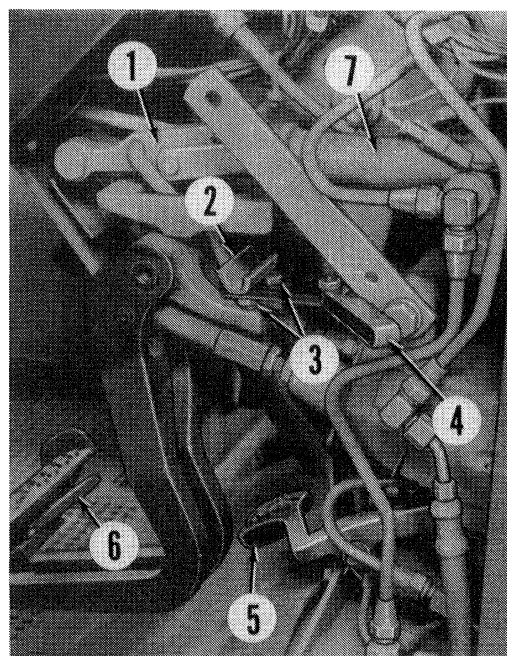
With differential lock pedal "ON," adjust cap screws (3) to obtain 0.010-0.030 inch (0.3-0.8 mm) clearance between head of screws and release bar (2).
